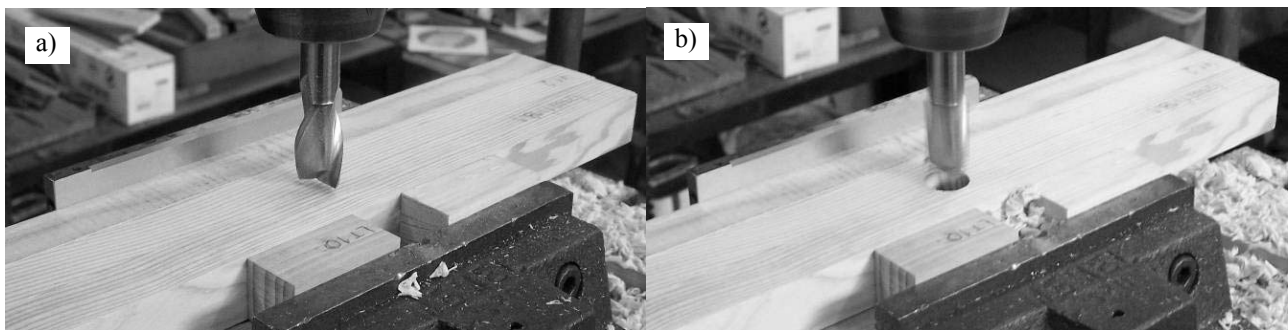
Setup in the drilling machine (a) and set of two beams after the drilling operation (b).
